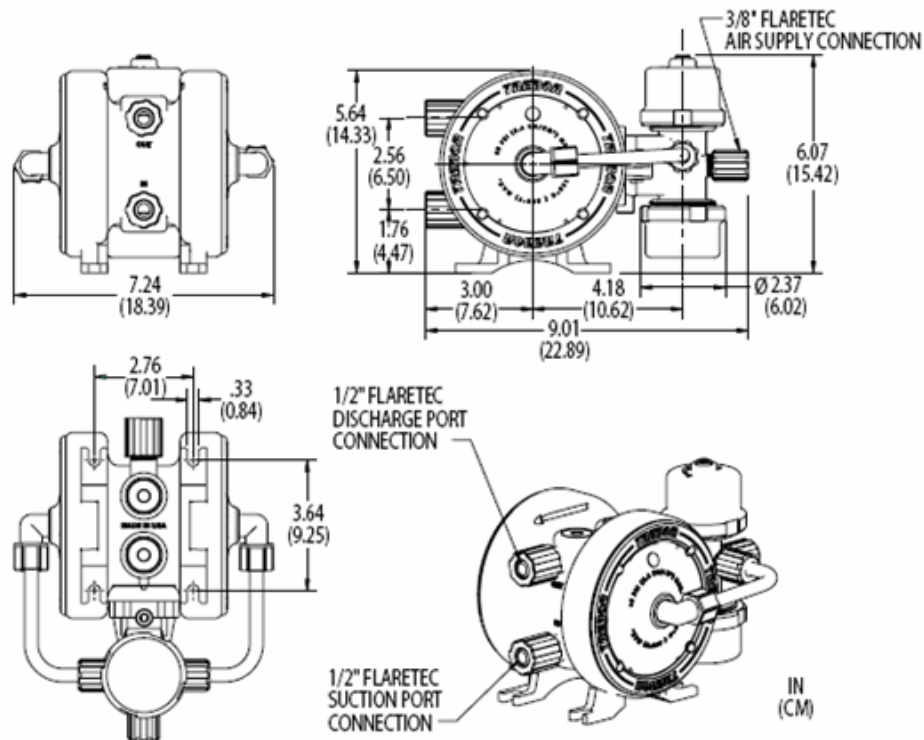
Dimensions (with mounted PC7 option & flare connection)
